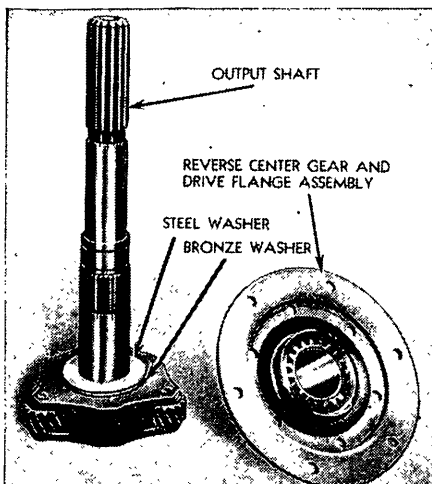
Lift reverse center gear from output shaft. Center gear and shaft is serviced as a unit—do not take apart
